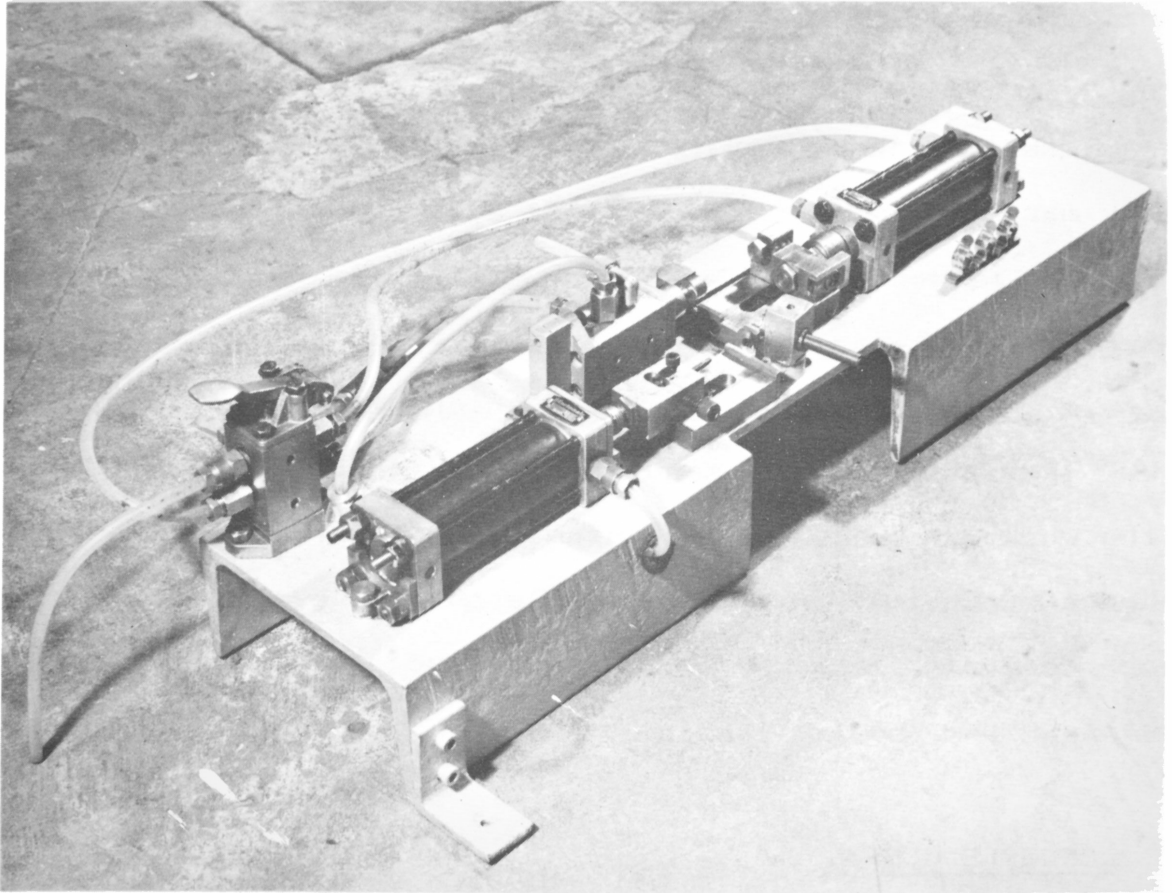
FIG. I GENERAL VIEW OF THE PROTOTYPE MACHINE
